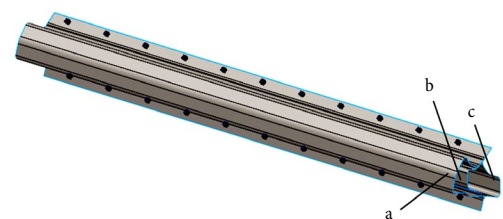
A-pillar with spot welding: a – outer section, b – middle section, c – inner section
